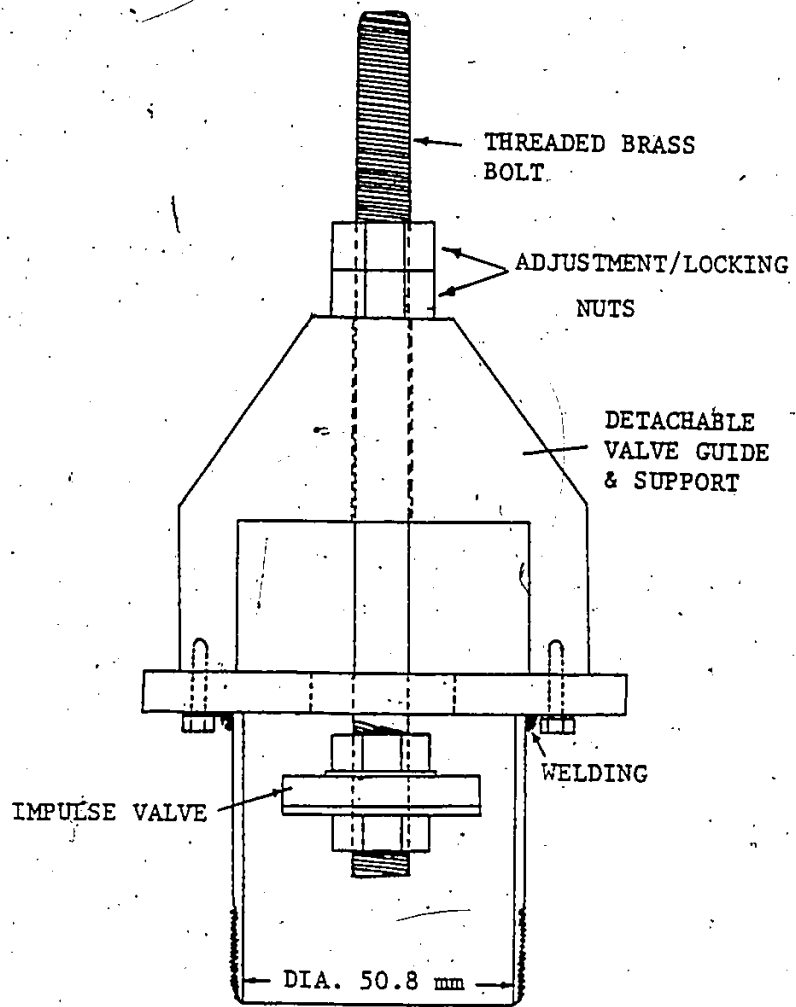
WEIGHTED IMPULSE VALVE FOR THE LOCALLY MADE HYDRAM
